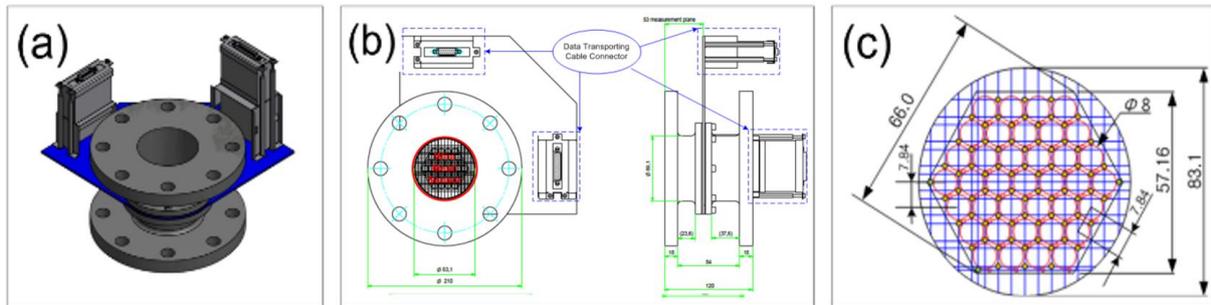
Design of a wire mesh sensor for 37-rod assembly
